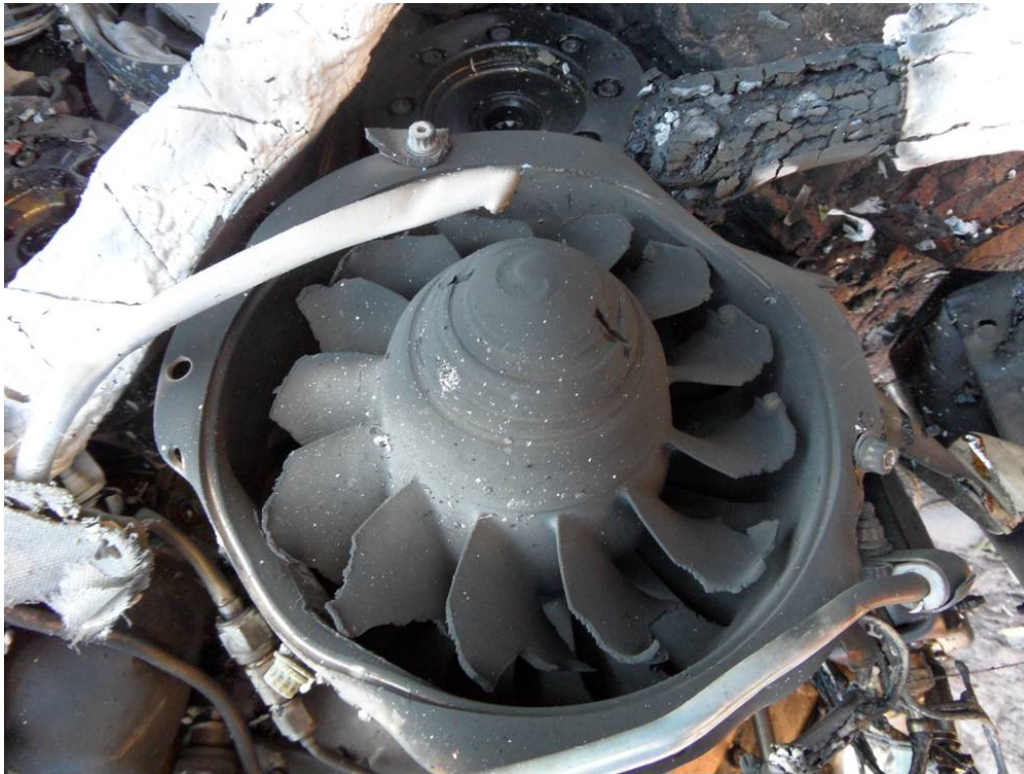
Engine inlet showing deformed compressor casing, severely damaged compressor axial stage, and circumferentially scored nose cone
